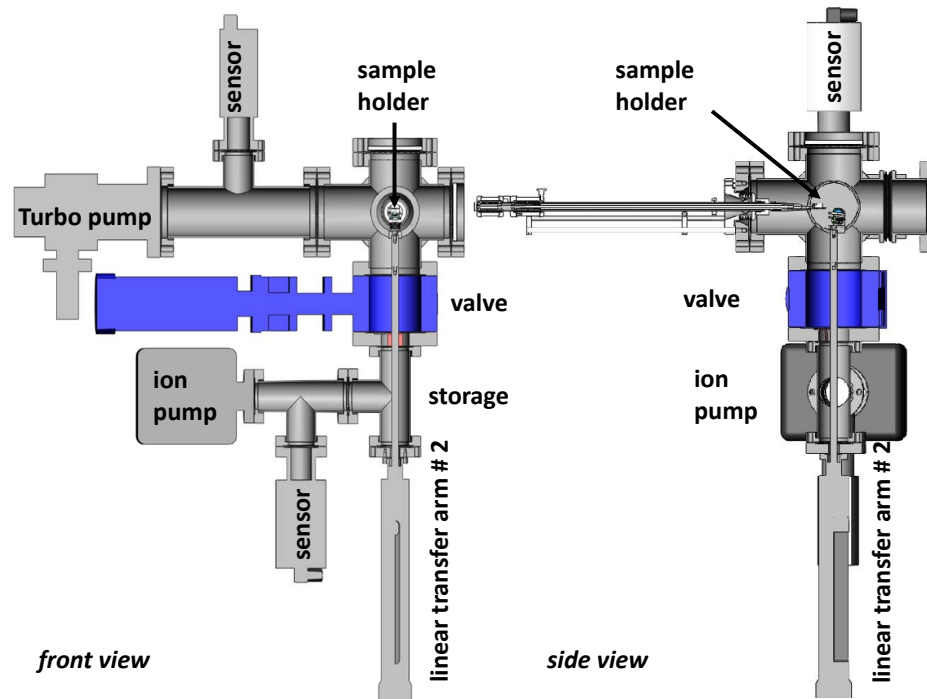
First version of the transfer chamber, technical drawing by Saša Vranjković.
